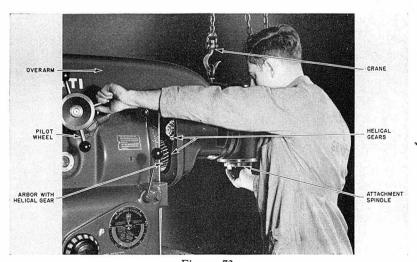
Mounting the Heavy Vertical Milling Attachment on the Machine.
